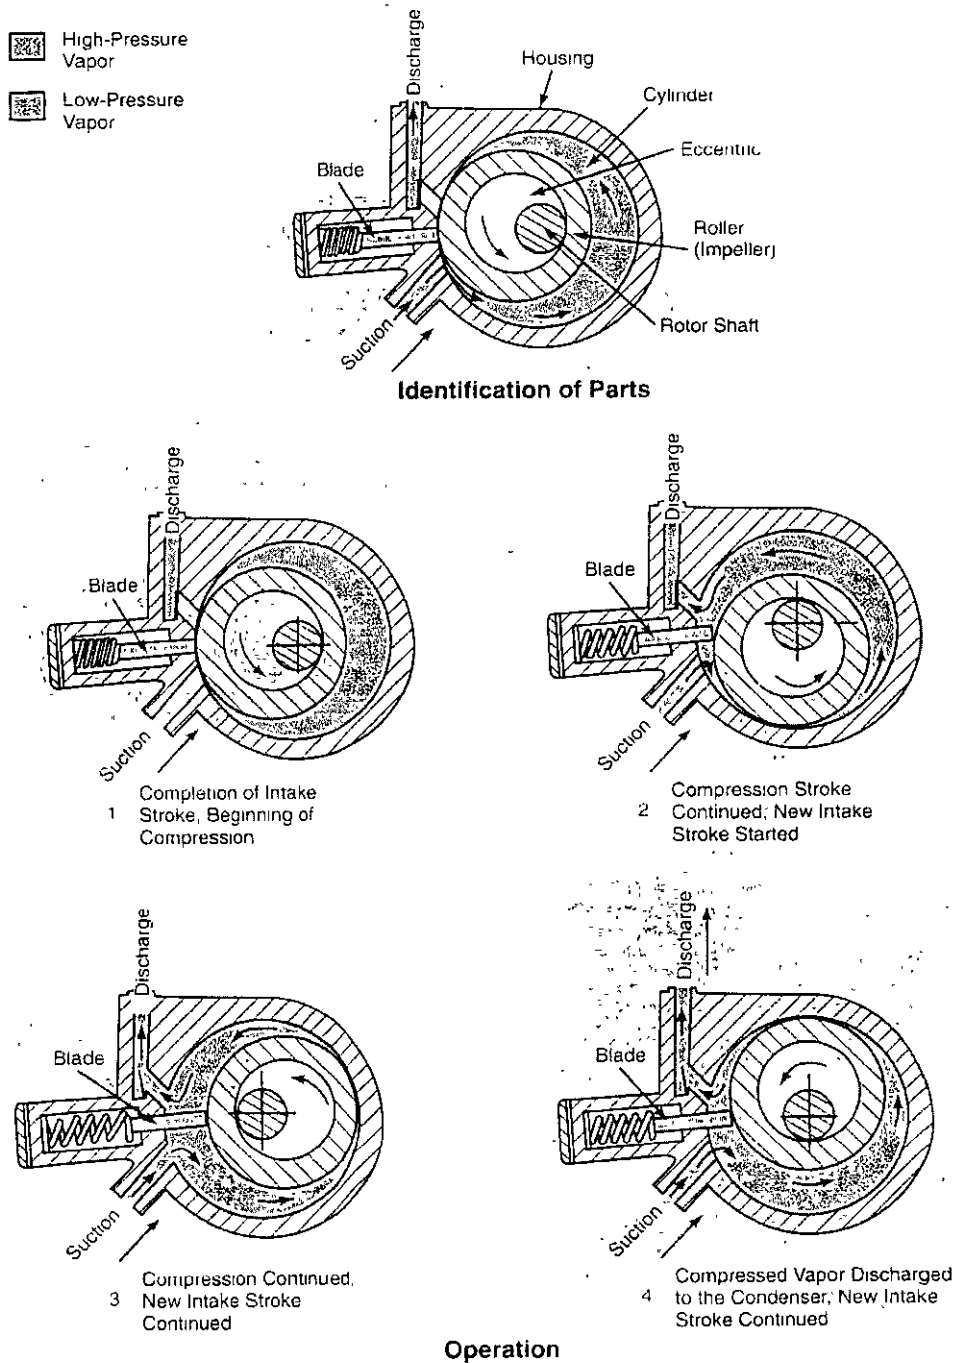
Rotary compressor. Stationary blade or divider block is in contact with an impeller
